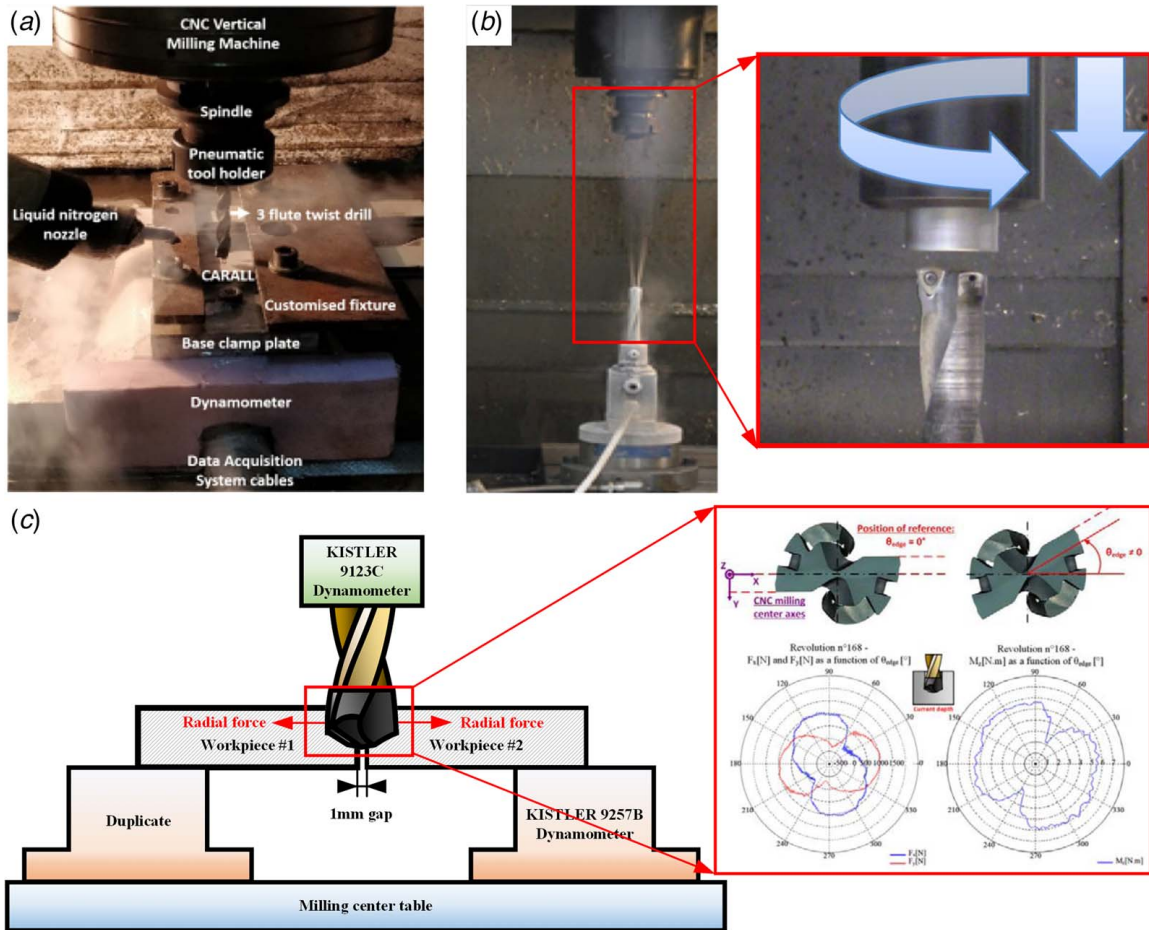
Different configurations of cutting forces measurement systems with dynamometer: (a) workpiece mounted on static dynamometer [93], (b) drill mounted on static dynamometer [85,149], and (c) cutting forces measurement in terms of phase angle through rotary dynamometer [100,129]
